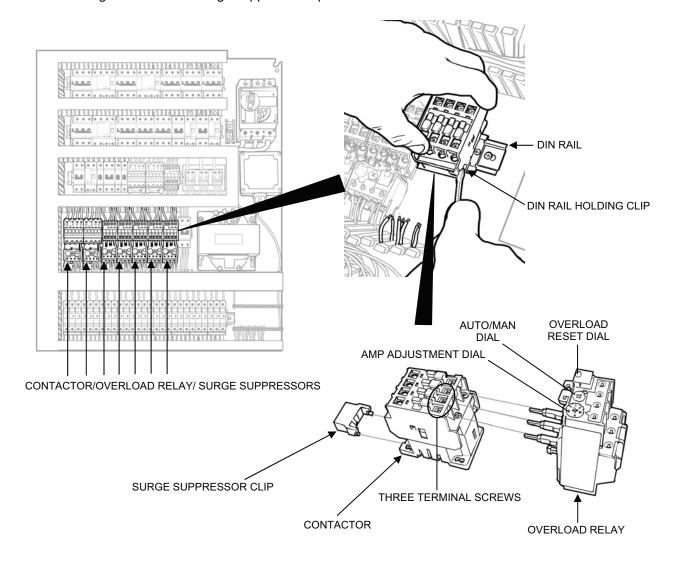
Contactor/Overload Relay/Surge Suppressor Assembly Replacement.
